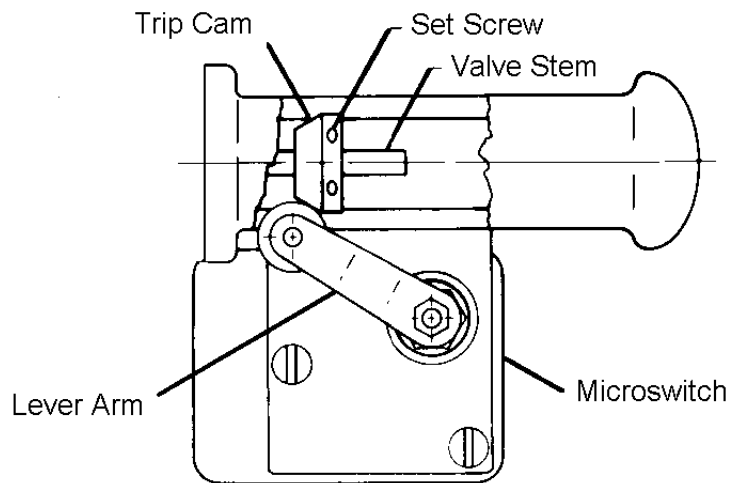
Valve Position Indicator Microswitch Trip Cam
